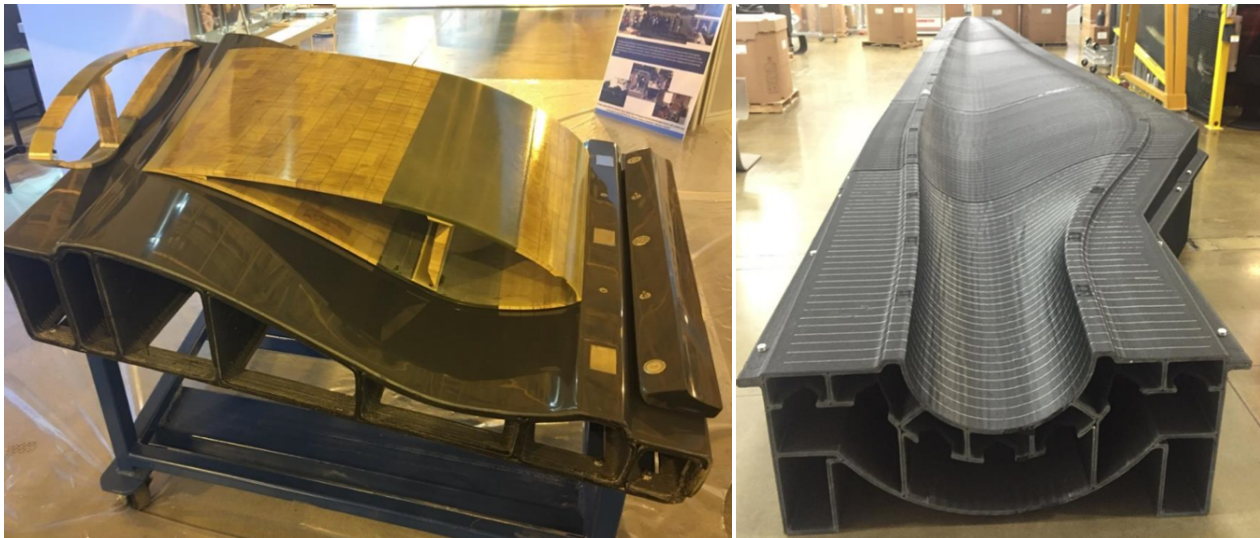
& 9b - On the left, an additively manufactured blade mold and a produced blade section, on the right, a partially completed low pressure blade mold, printed and assembled in different parts (Source: Post et al., 2017)
